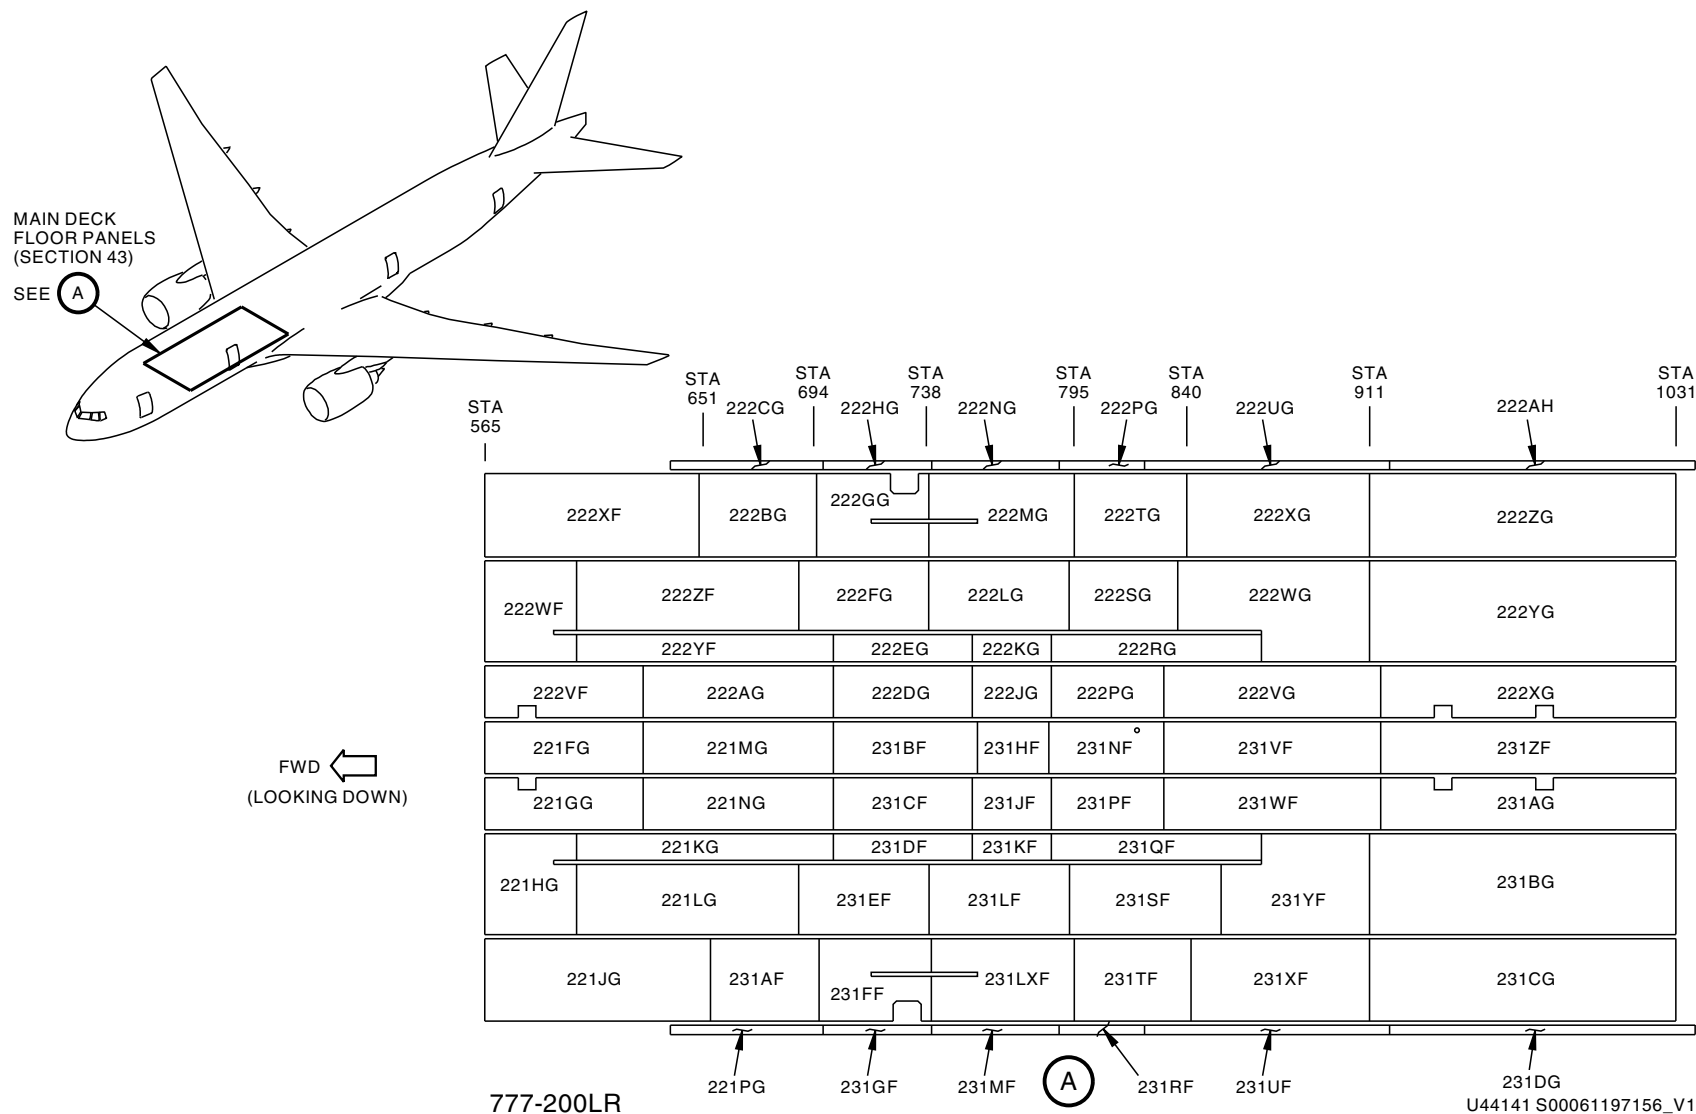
SUB-MAJOR ZONE 221/231 PASSENGER FLOOR PANELS
